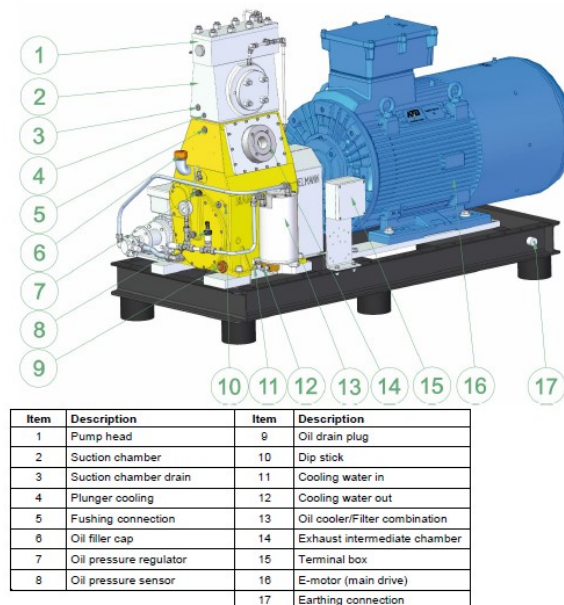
Construction and layout of the Hammelmann high-pressure fuel pump. [22]
